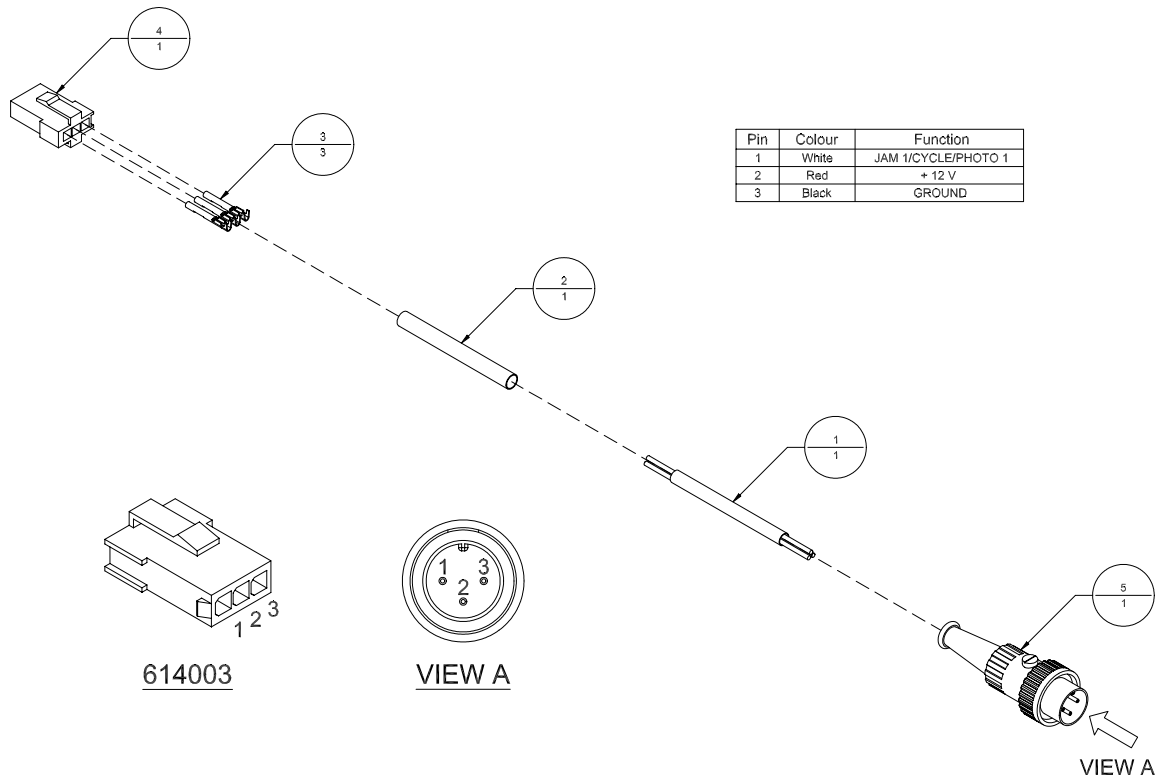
Jam/Proxi/Photocue Extension Cable (9100724A)
